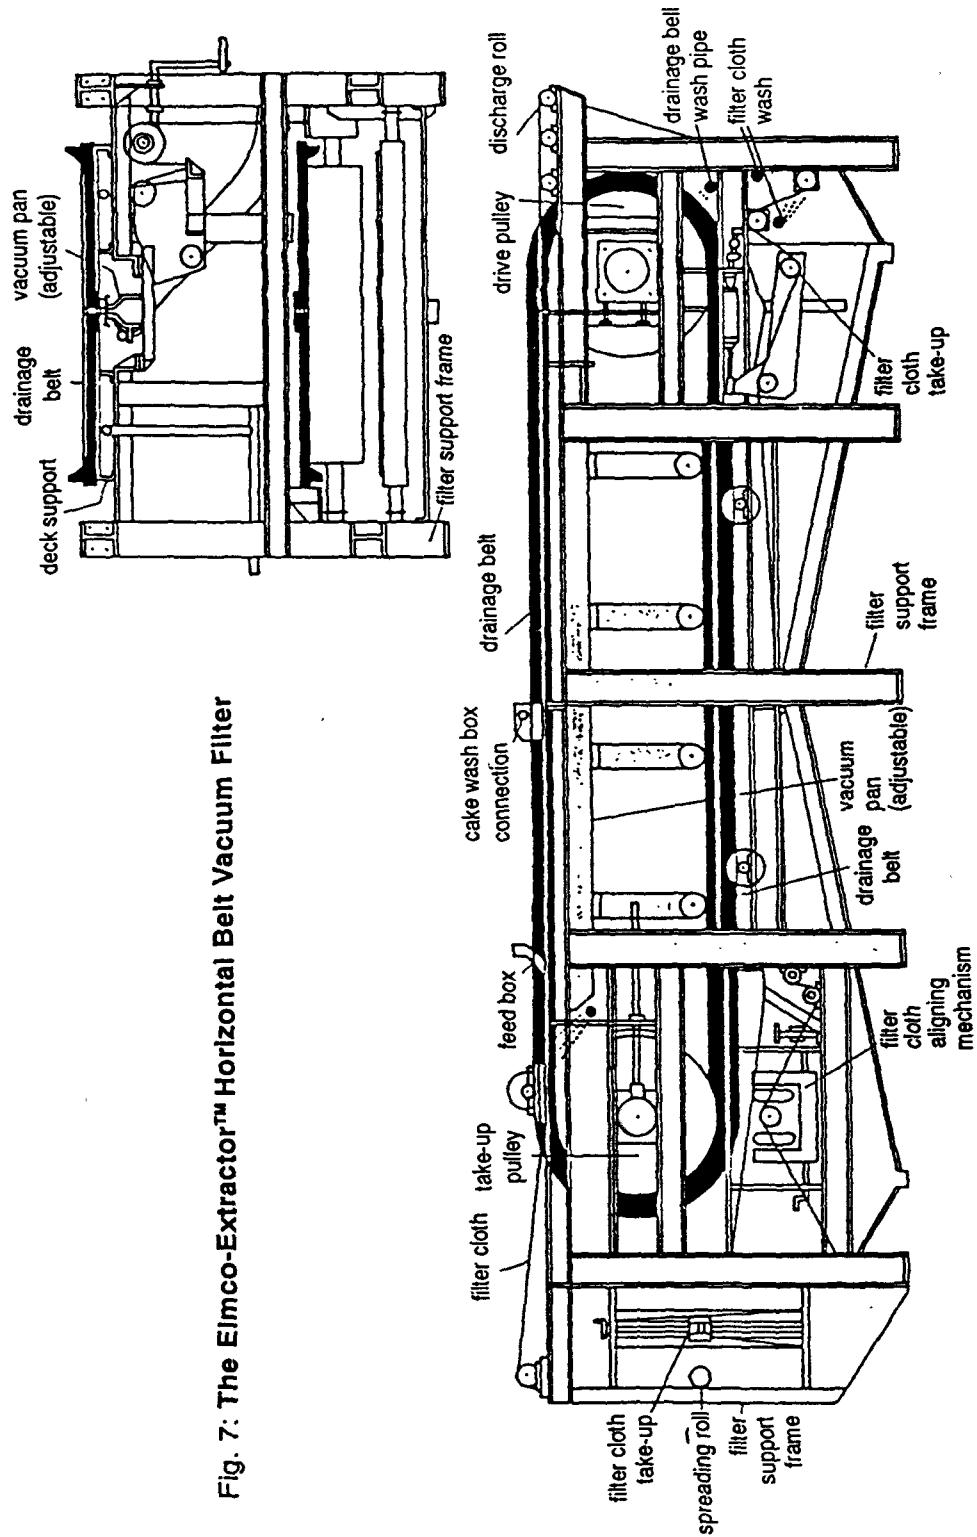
The Elmco-Extractor™ Horizontal Belt Vacuum Filter
